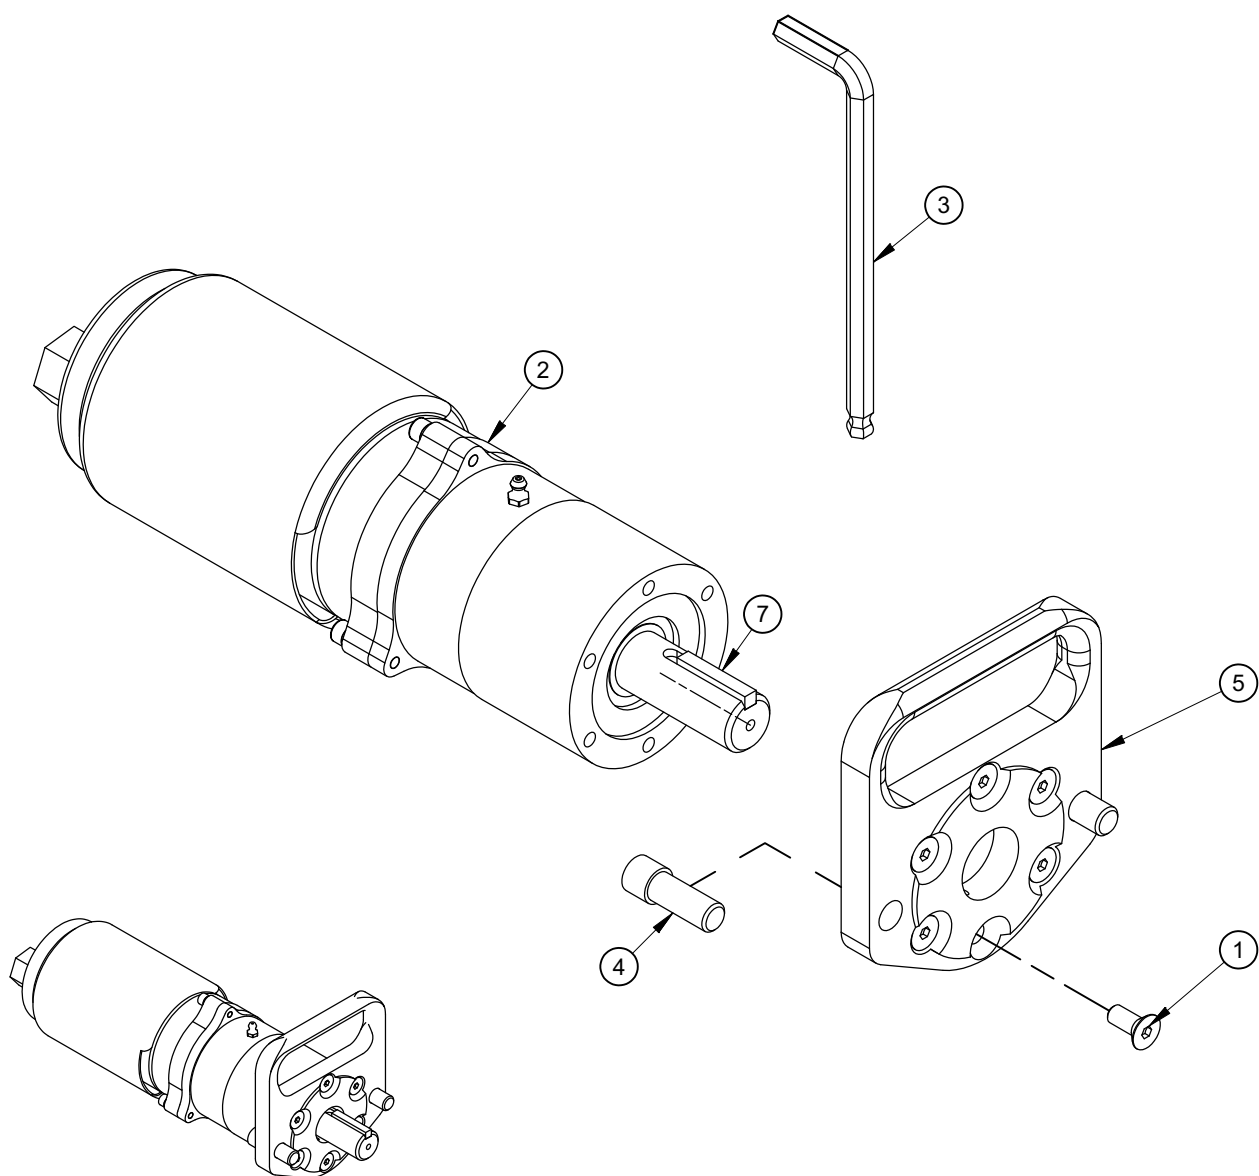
HD AXIAL FEED UNIT ASSEMBLY (P/N 91518)
